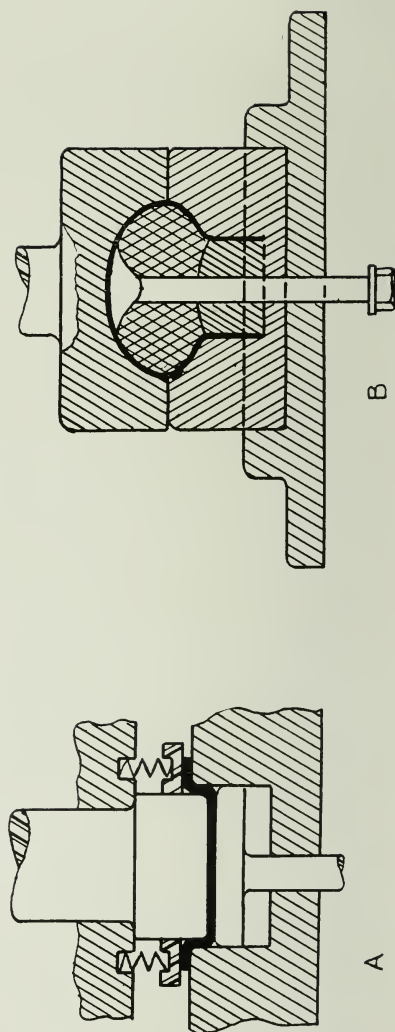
A—Features of a Draw Die with Pressure Pads, —B—Bulging Die with Rubber as Expander.
